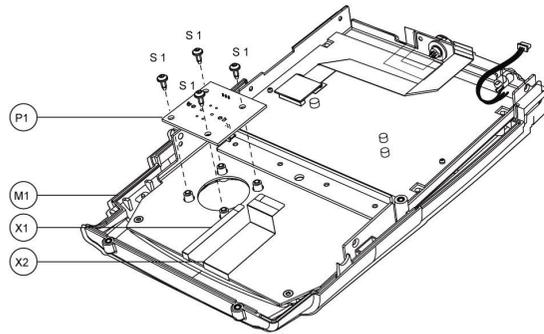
Remove ROTARY PRINT from FRONT MODULE
